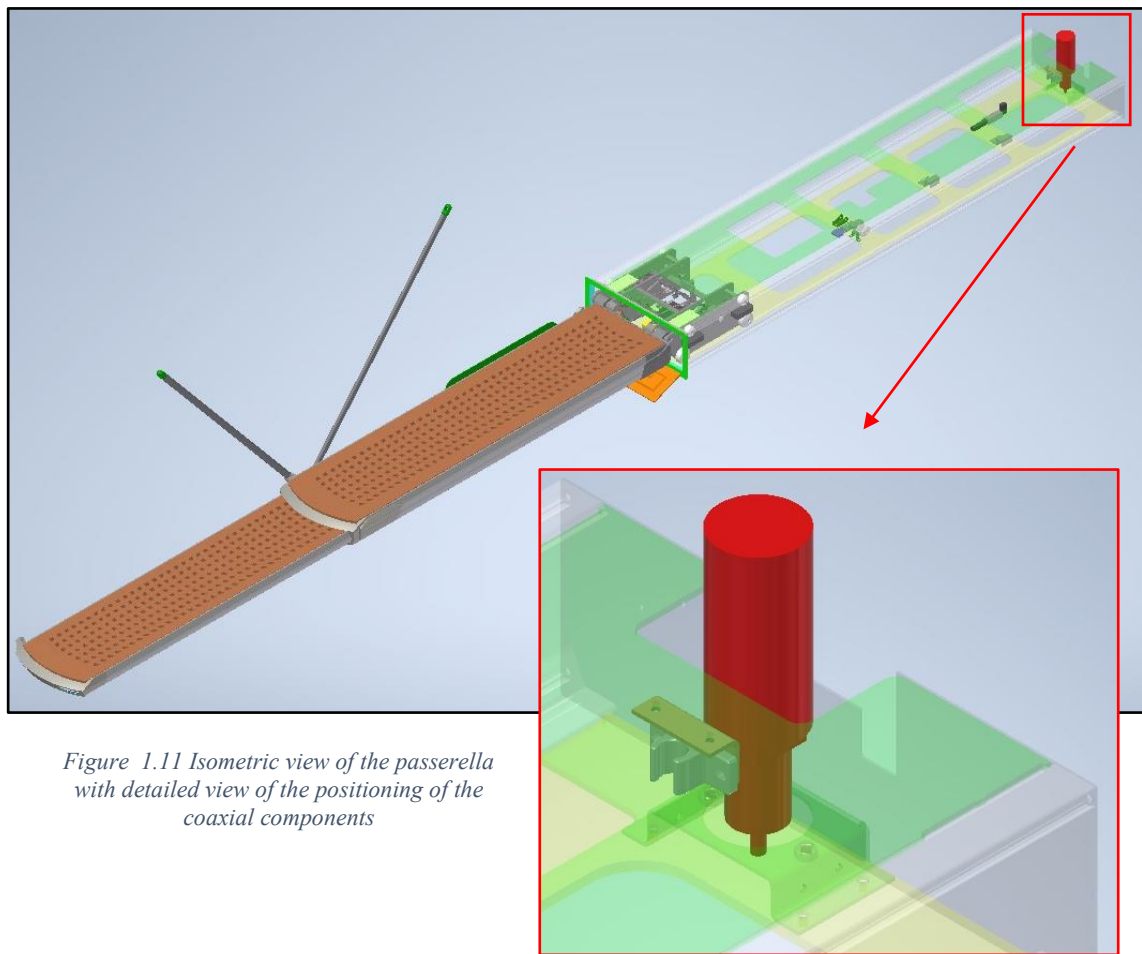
Isometric view of the passerella with detailed view of the positioning of the coaxial components
